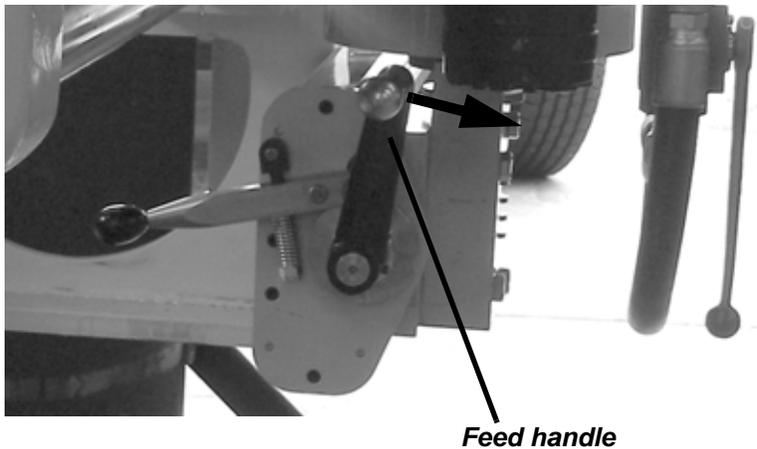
Turn the feed handle clockwise to retract the saw bow. (Note that the handle can be mounted on either end of the feed screw. Turn it counter-clockwise if it is on the saddle end of the screw.)
